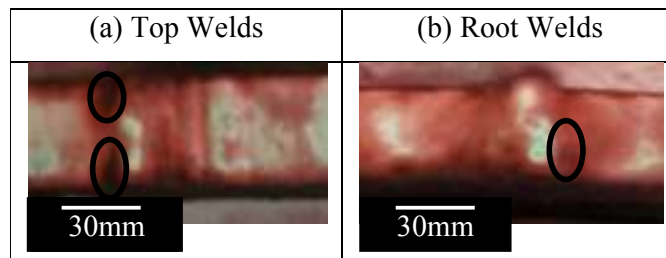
Liquid Penetrant Inspections of Specimen 1
